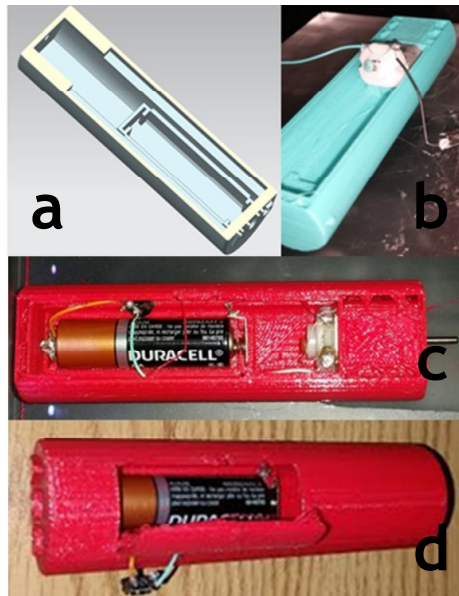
Electric fan: (a) CAD design, (b) placing motor, (c) interior view, (d) prototype.
